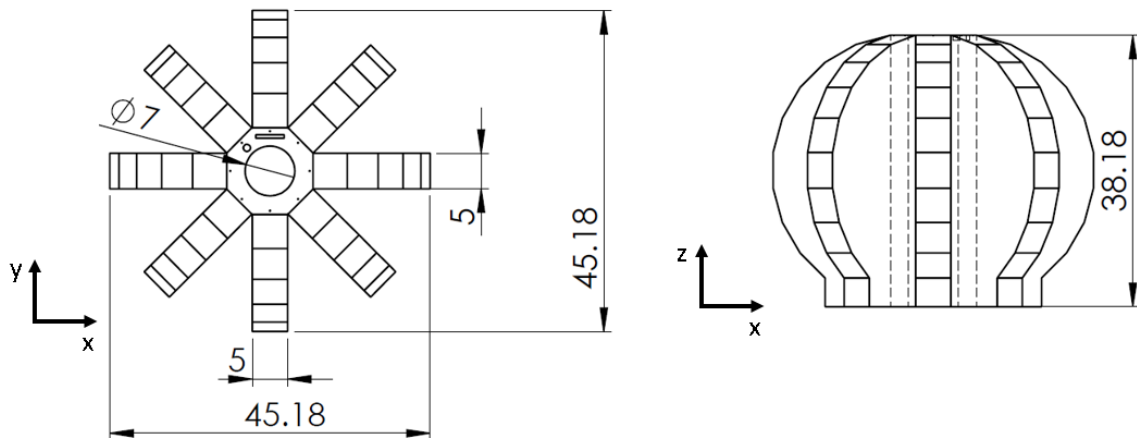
Schematic of the test artifact. Dimensions are in millimeters.
